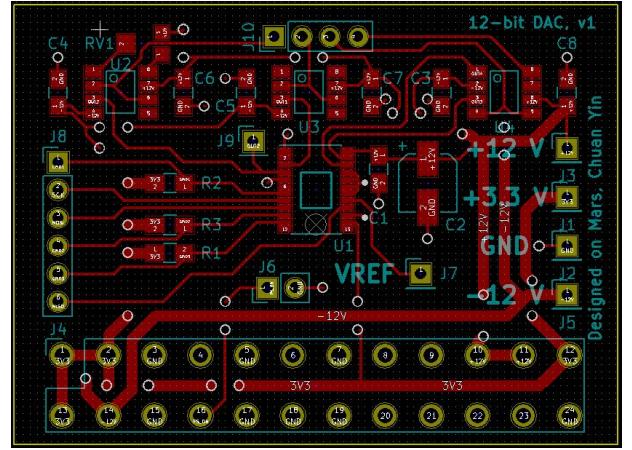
KiCad footprint of the front side of the PCB: red indicates copper traces for electrical connection and copper pads for surface-mount technology (SMT) components; yellow indicates copper pads for through-hole components thus exist on both sides; blue indicates front silkscreen which does not play any electrical importance; the white circles are vias that electrically connect the two layers. Front soldermask is not shown in this picture.
